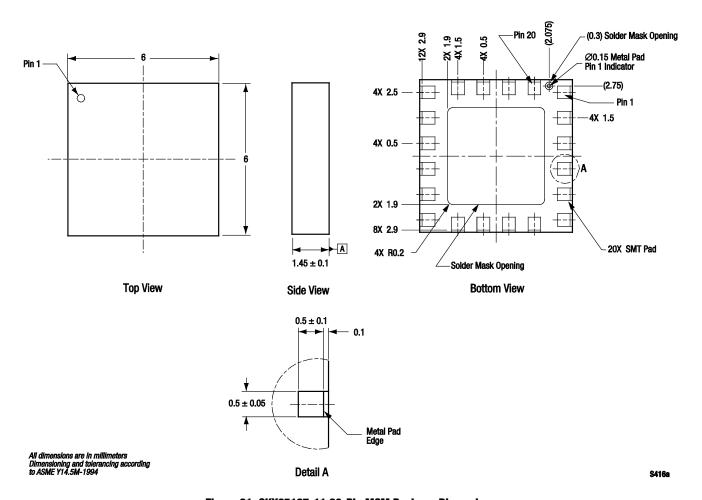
SKY65127-11 20-Pin MCM Package Dimensions
